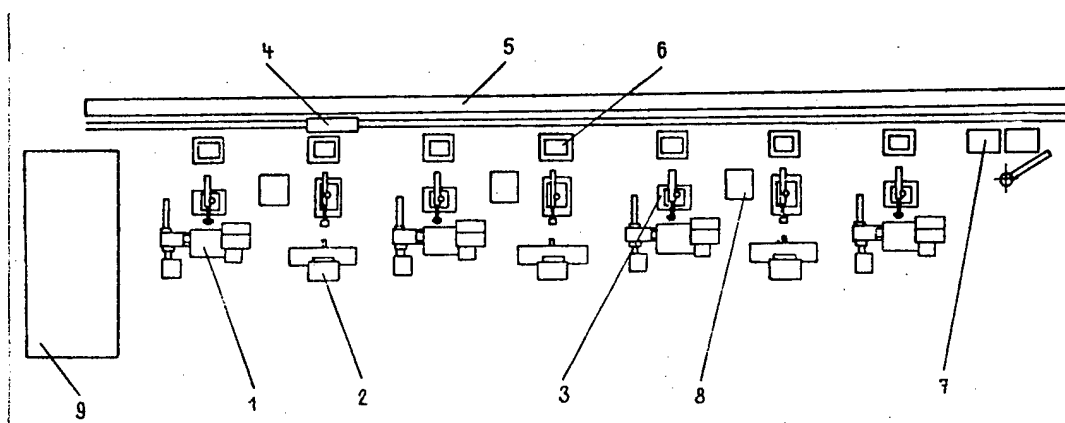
Layout of CAM System for Making the Light-Alloy End Shields of Electric Motors
